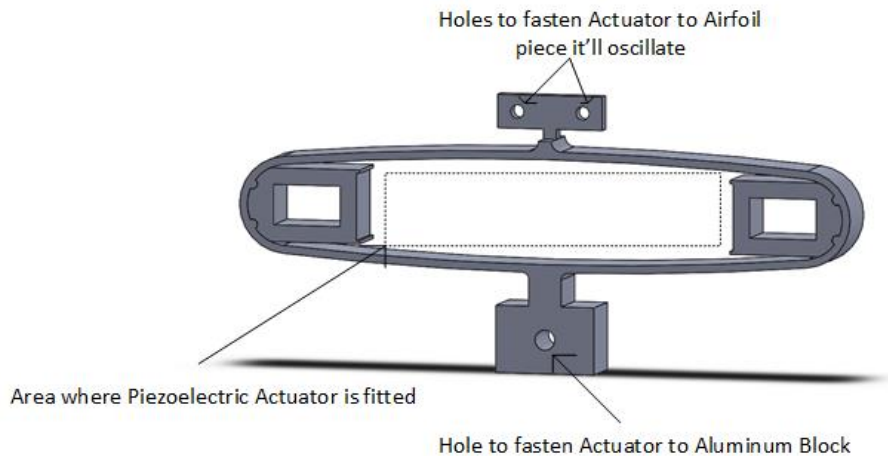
Oval Loop 3D CAD Model Showing Holes For Fasteners
